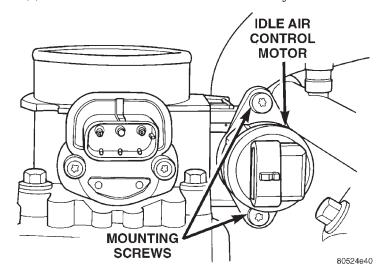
Mounting Bolts (Screws)—IAC Motor—4.0L Engine
